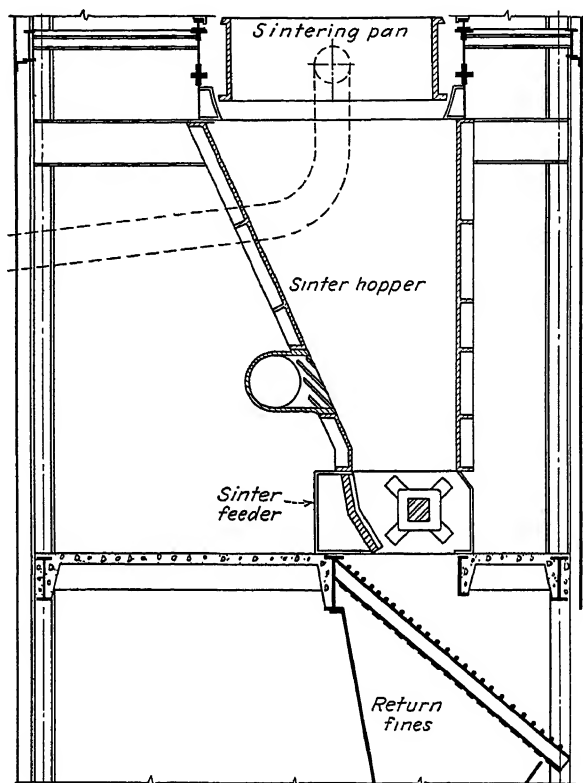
METHOD OF AIR-COOLING SINTER.
